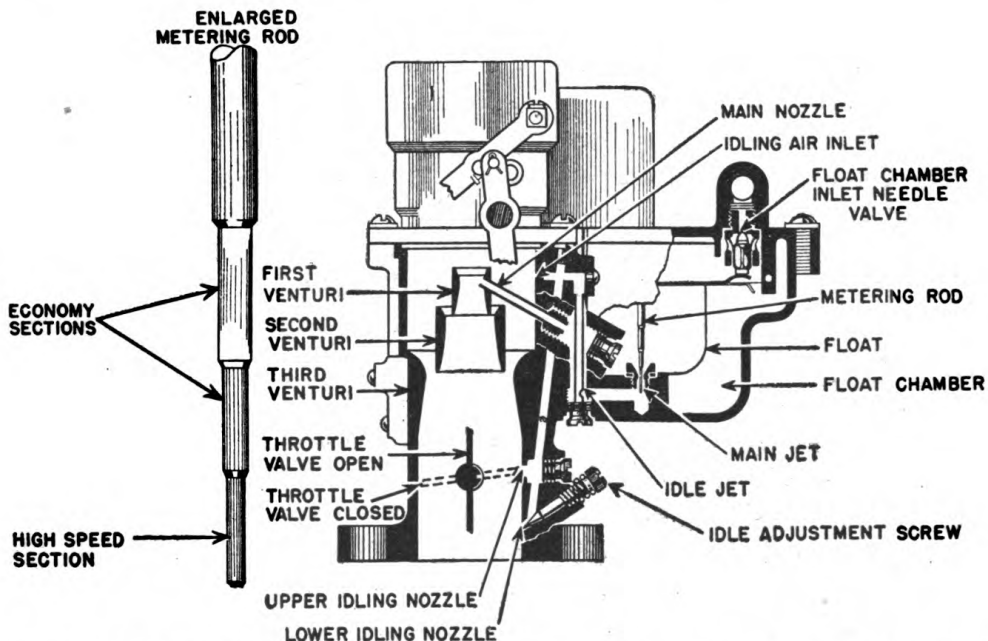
Sectional view of mechanically controlled metering rod type carburetor.
